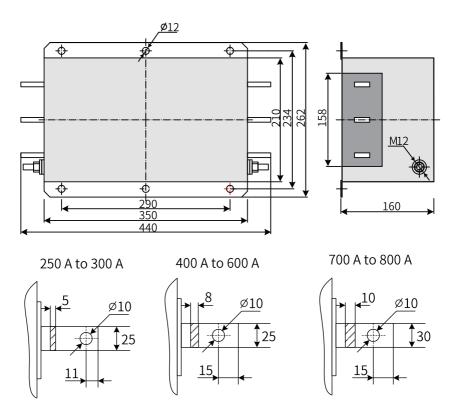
Dimensions of Jianli filters (250-800 A, unit: mm)
